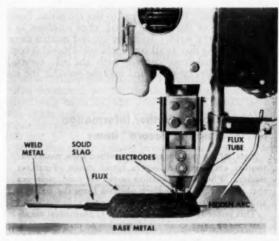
Details of type LAF, automatic flux recovery twinarc welding machine. Welders of this type are capable of welding plate 8 in. thick and operate at considerably greater speeds than single-wire machines.
